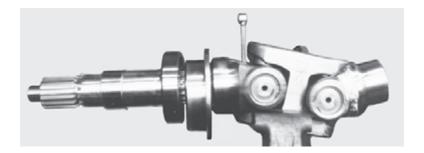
Attaching the Input Shaft to the U-Joint (bolted flanged retainer shown but not used in all drives)
